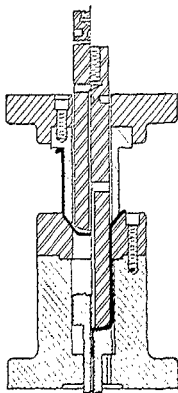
Double-action redraw die for beveled bottom corner cups.¹
